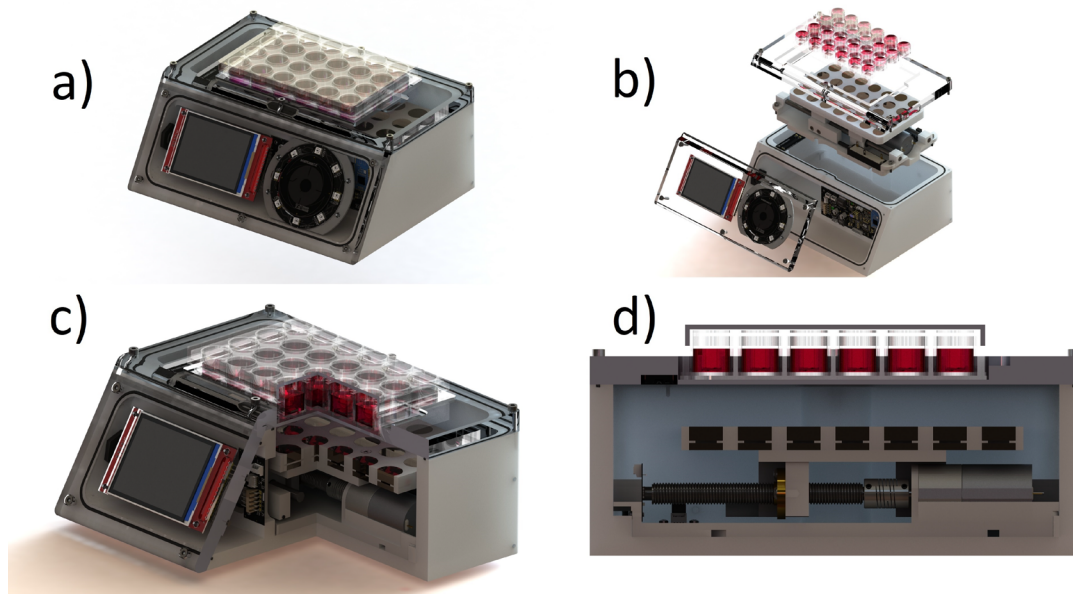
a) Bioreactor assembled with tissue plate and culture trimetric view, b) disassembled with all main electric and mechanical components, c) L-cut view and d) transversal cut with the display of the mechanical component.
